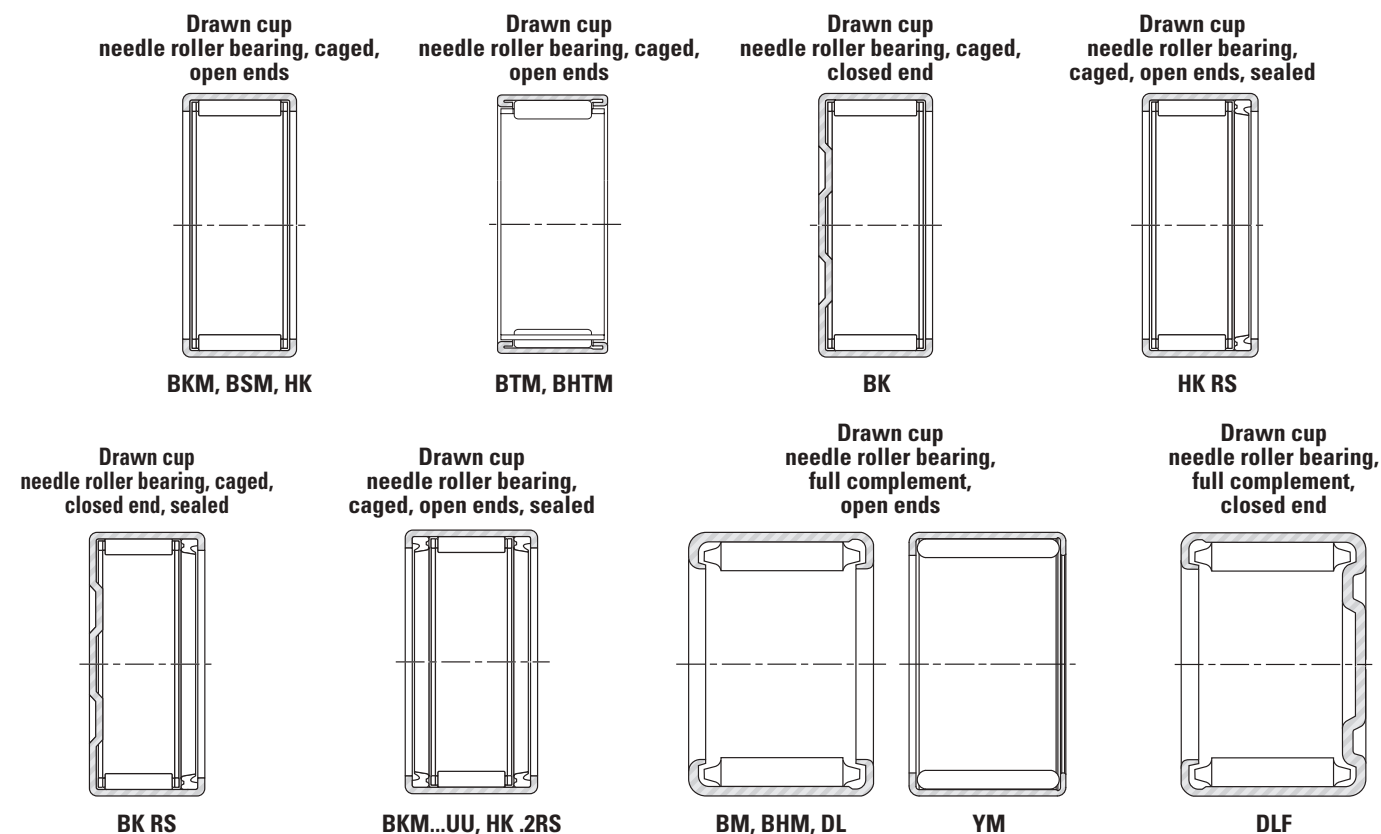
Types of metric series drawn cup needle roller bearings
